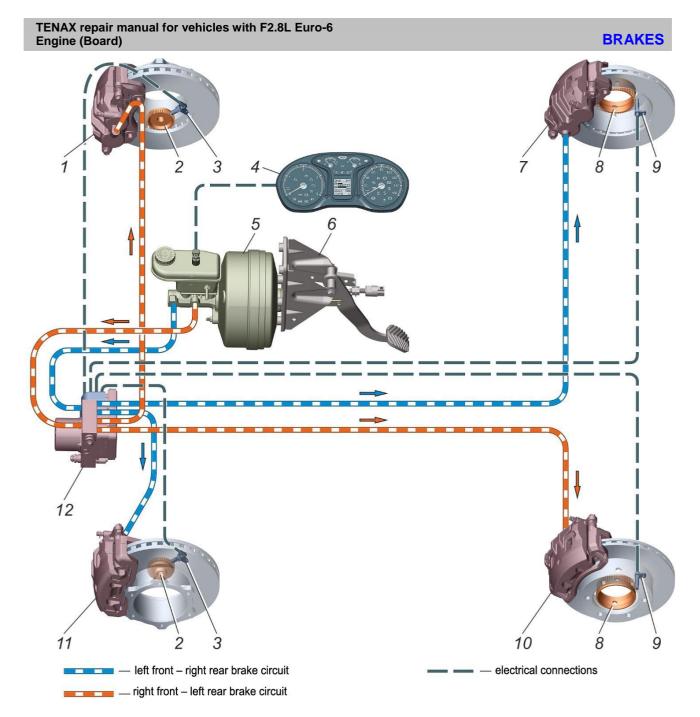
Primary brake system drive diagram: 1 - front right disc brake; 2 – front ABS rotor; 3 – front ABS sensor; 4 – instrument cluster; 5 – vacuum booster with brake master cylinder and tank; 6 – bracket with brake pedal; 7 – rear right disc brake; 8 – rear ABS rotor; 9 – rear ABS sensor; 10 – rear left disc brake; 11– front left disc brake; 12 – hydraulic control valve;
